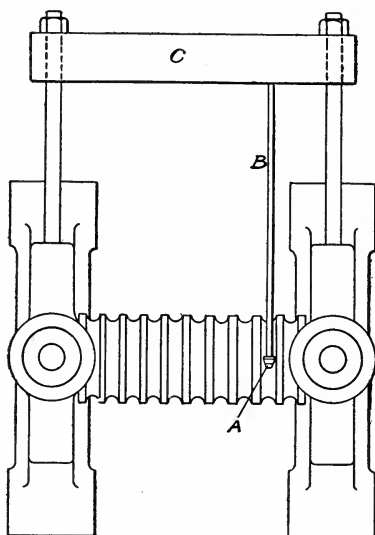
Making Seamless Tubes. Tube Rolls.
